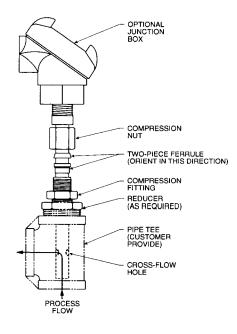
Compression Fitting Parts Arrangement For Insertion Mounting
